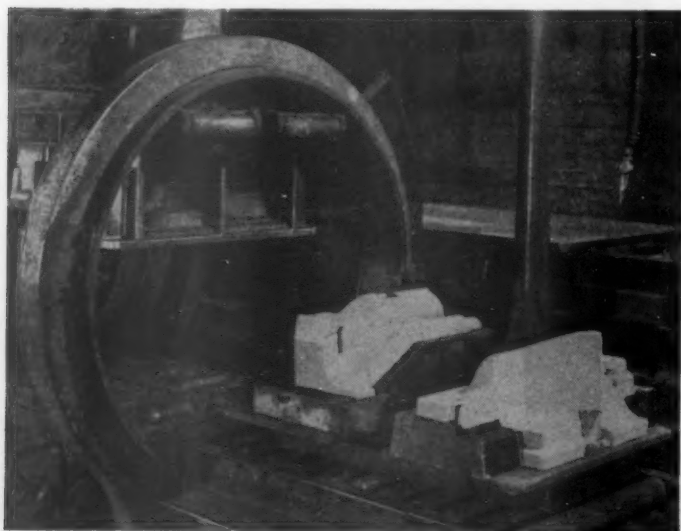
COMPLETED CORE AFTER GOING THROUGH THE OPERATION OF ROLLING OVER AND DRAWING CORE BOX, READY FOR THE CORE OVEN.
